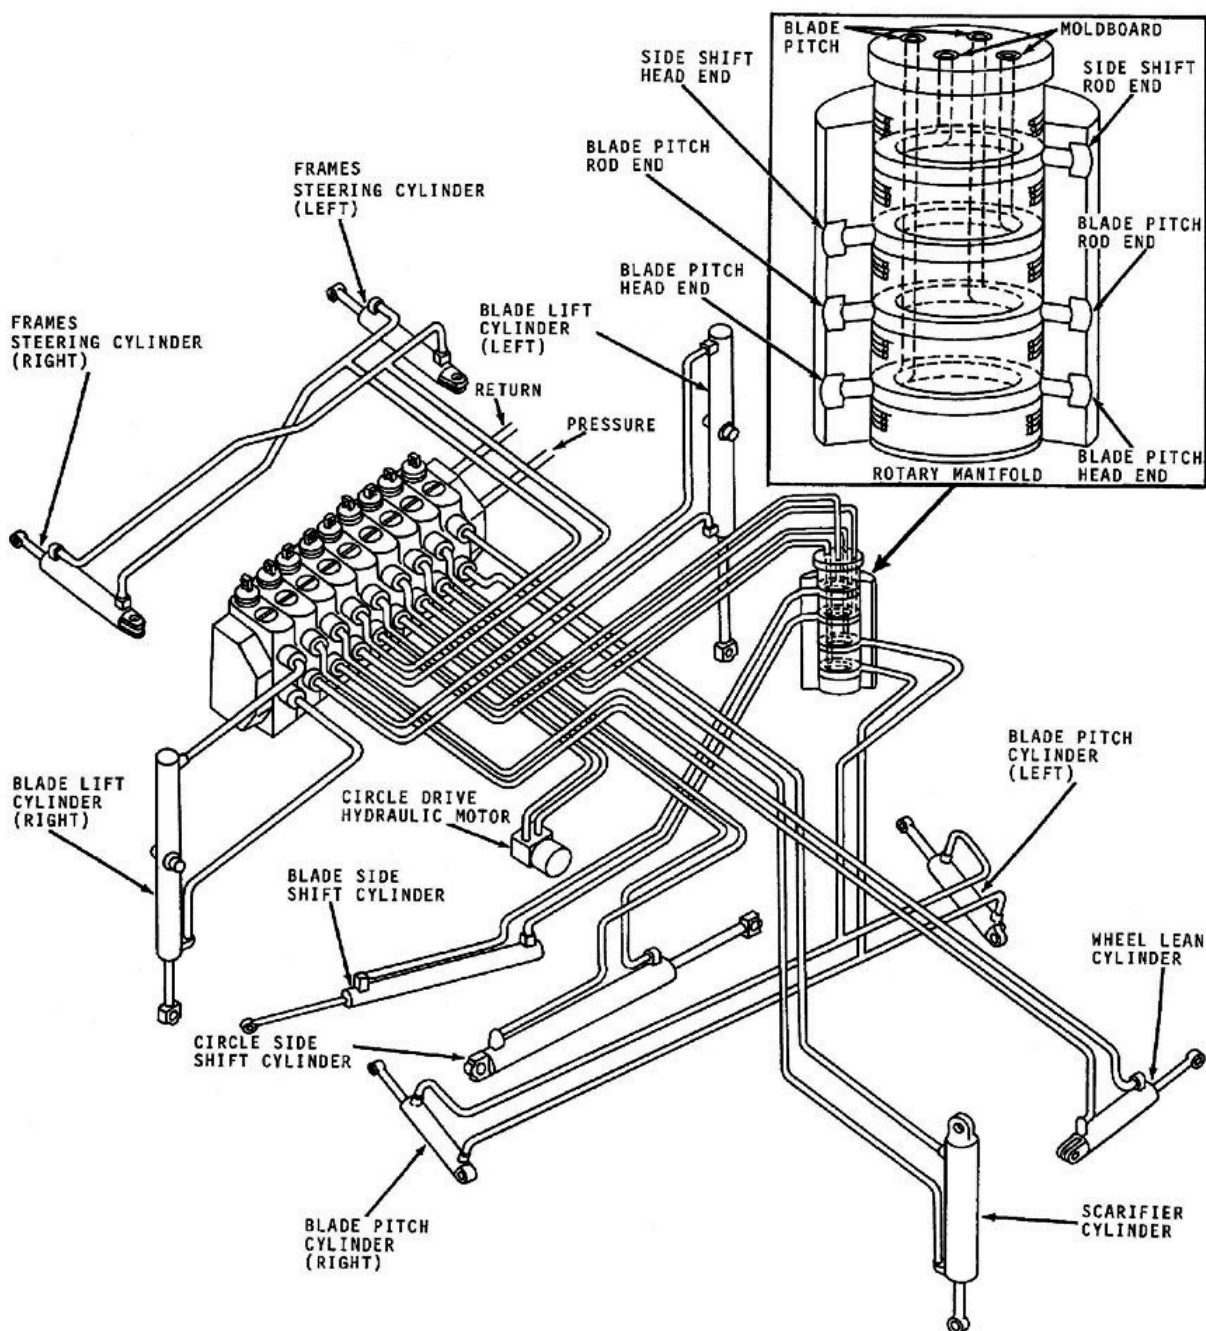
Hydraulic valve stack and rotary manifold (Inset) diagram.
